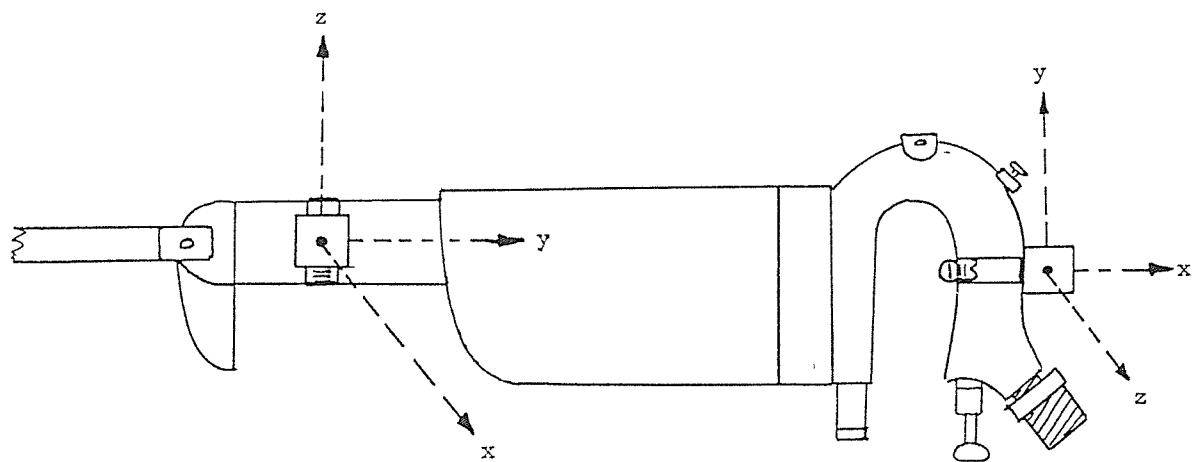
Hose clip accelerometer mount on power hacksaw
